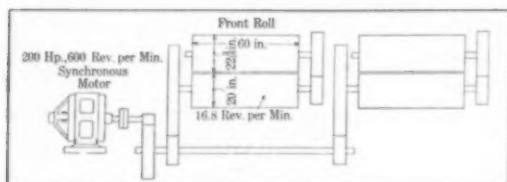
Schematic Arrangement of Two 60-in. Mills with Coupled Type Synchronous Motor
